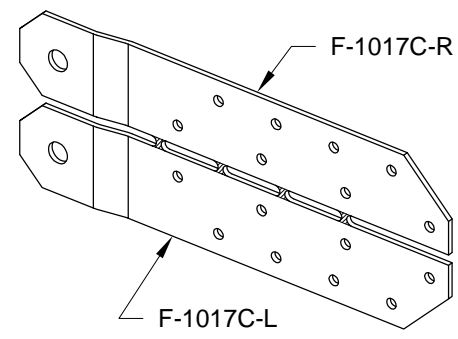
SEPARATE F-1017C SEAT BELT ATTACH LUG
